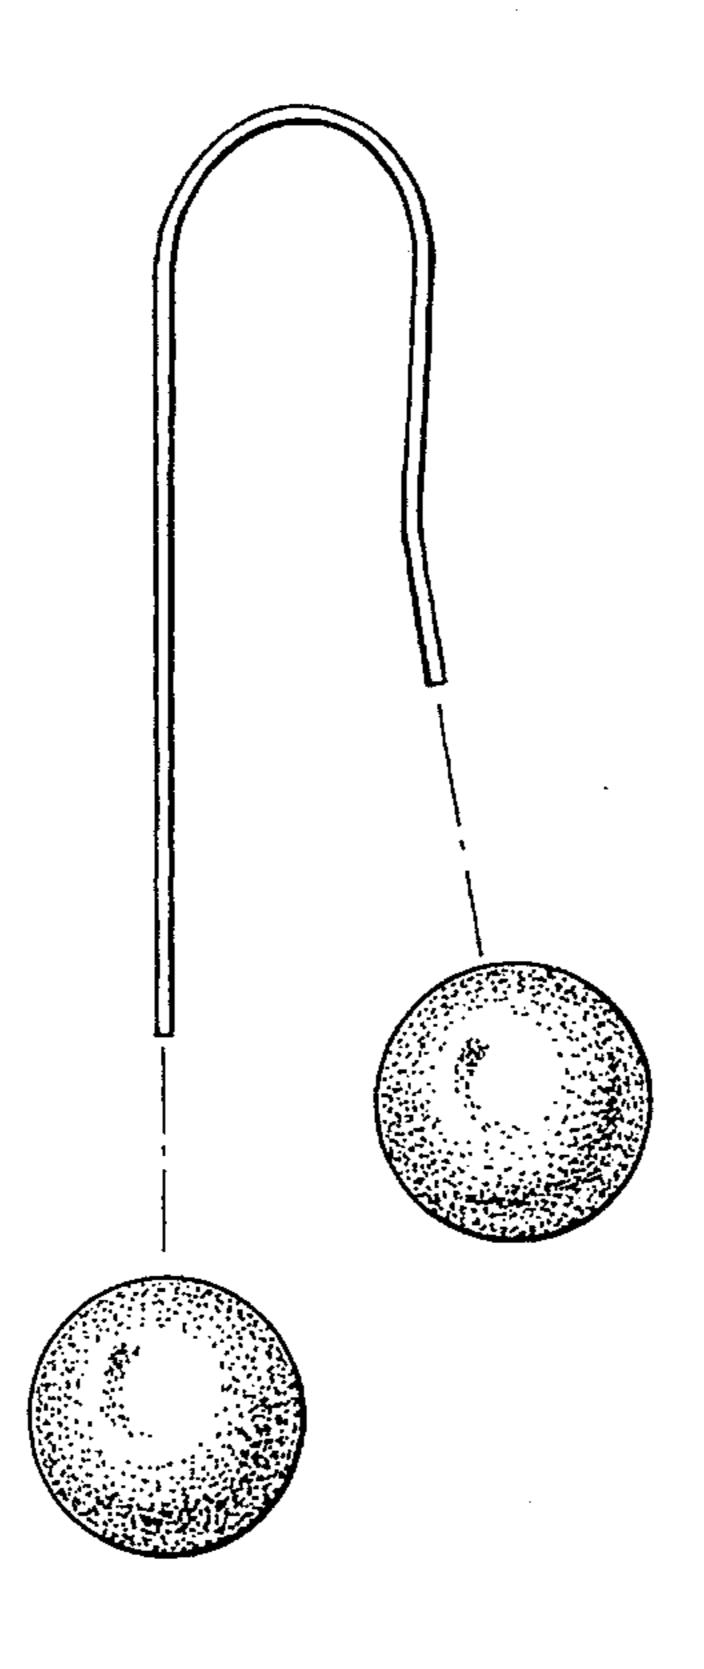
is an exploded view of the third embodiment, shown in its entirety; and,
